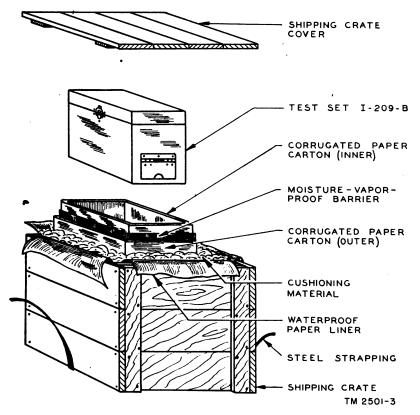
Test Set I-209-(*), packaging and packing diagram.
